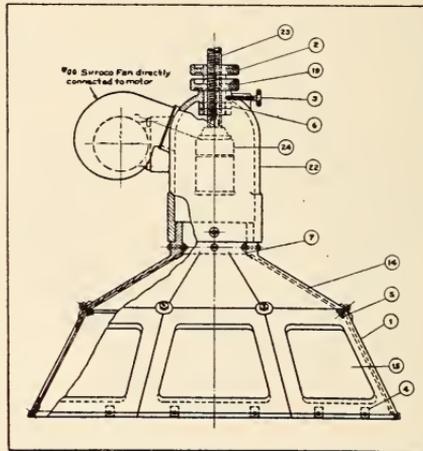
Elevation showing assembled reflector unit with Ventilating blower and lamp socket
